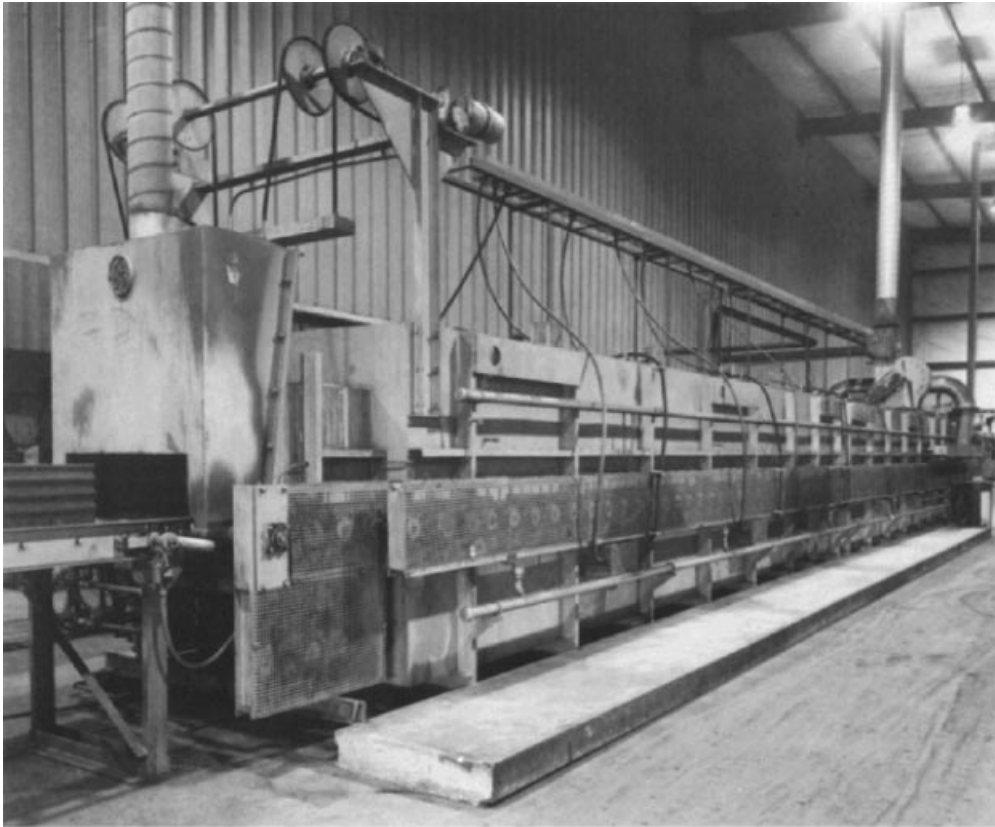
Roller-hearth furnace. (Courtesy of Wellman Furnaces, Inc.)
